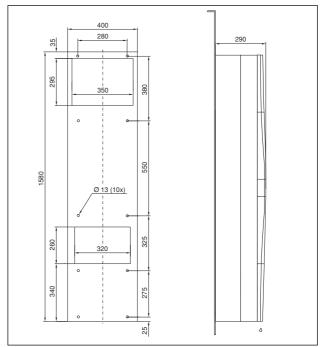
SK 3328.xxx/SK 3329.xxx external mounting
